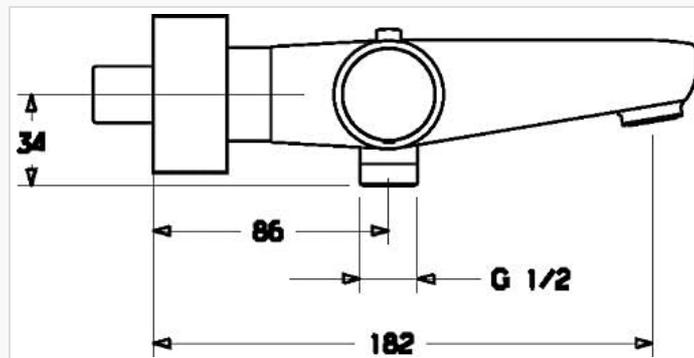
Technical drawing showing key dimensions. Overall depth is 182mm. Connection size is G 1/2.
